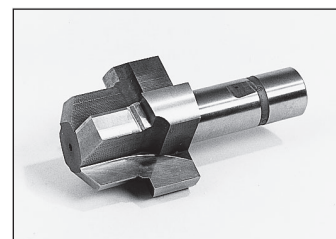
SAE Straight Thread Port Counterboring Tool
